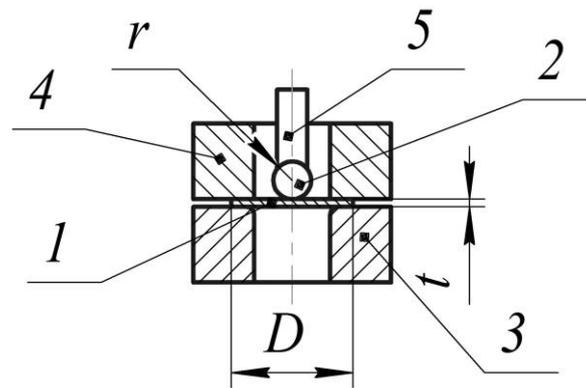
Typical scheme of the loading and fixation of the disk microsample: (1) – sample; (2) – indenter; (3) – low clamping matrix; (4) – upper clamping matrix; (5) – rod of the indenter holder
